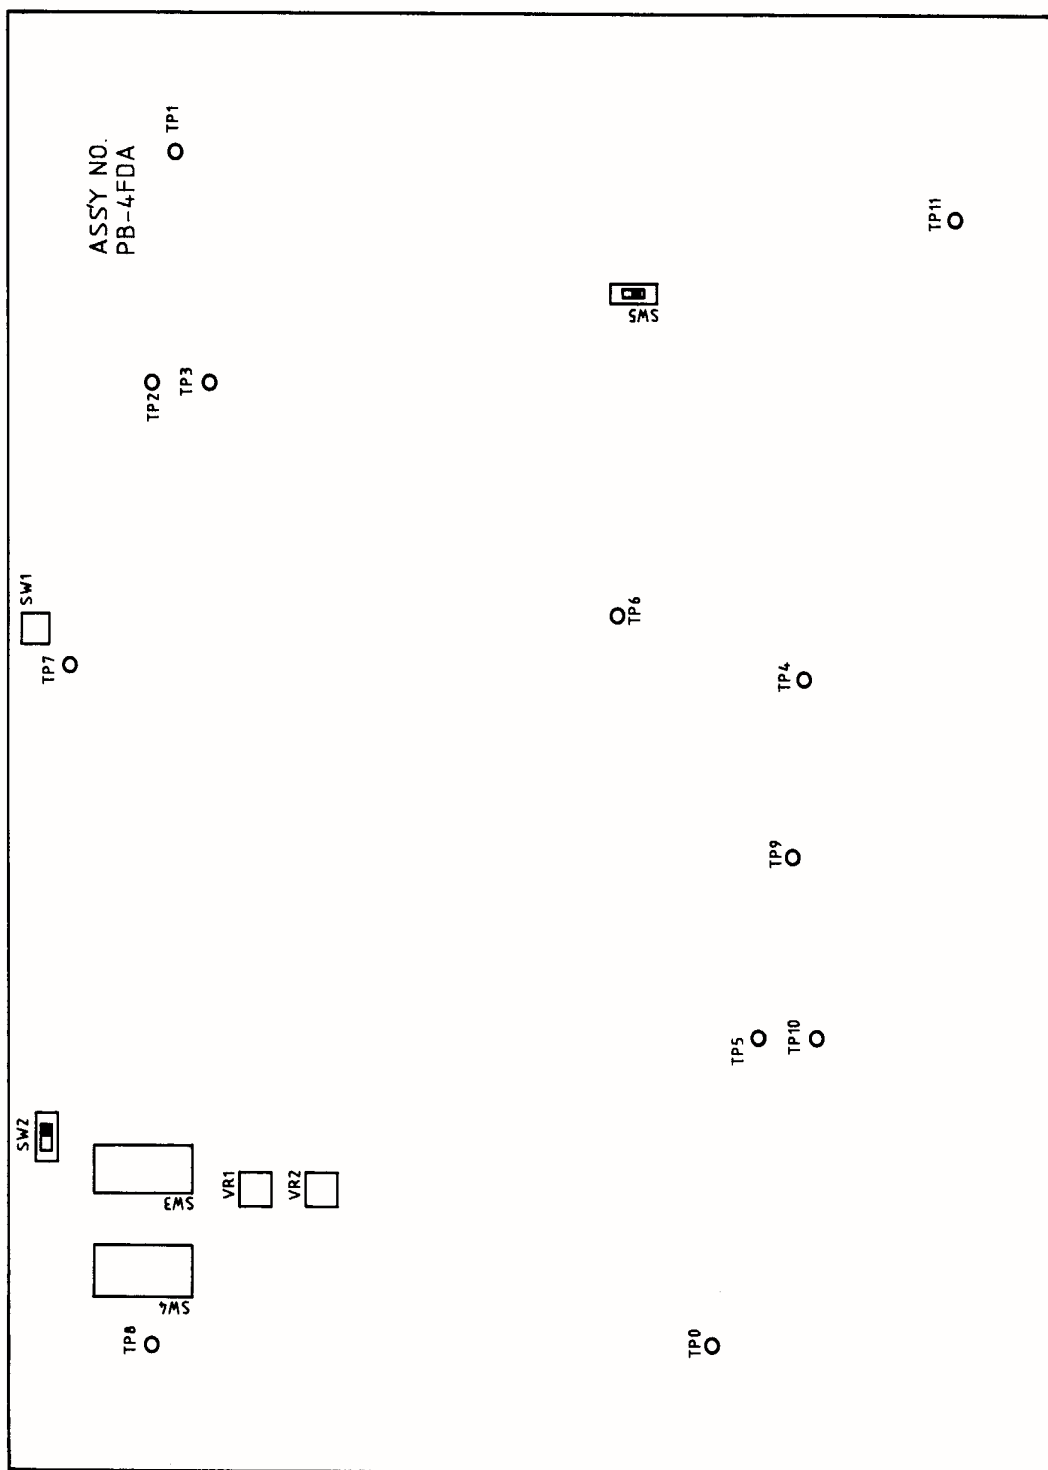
Location of Trimmers and Check Points on Transport Control PCB
